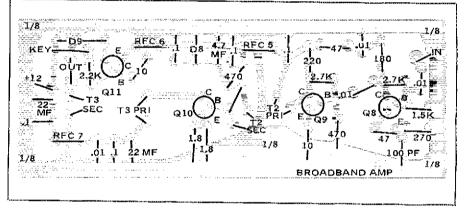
Parts placement guide for the amplifier pc board. The shaded area represents an X-ray view of the etched foil pattern; this view is from the component side of the board. (See Hints and Kinks in this issue for etching patterns.) Double-sided board is used for this module. The foll on the component side is used as a solid groundplane, having only clearance holes for the mounting of the components. The commercially made board shown in the photo also has component identification information etched on this side of the board. All mounting holes on pc board marked with a "1/8" should be drilled through with a 1/8-inch drill bit. The board can then be mounted to the chassis with 6-32 machine screws, spacers and nuts.
